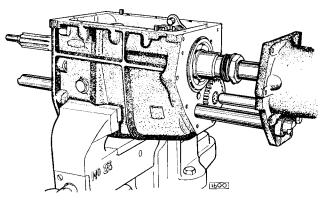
Showing the removal of the extension: note the dummy countershaft inserted at the front end of the casing.
